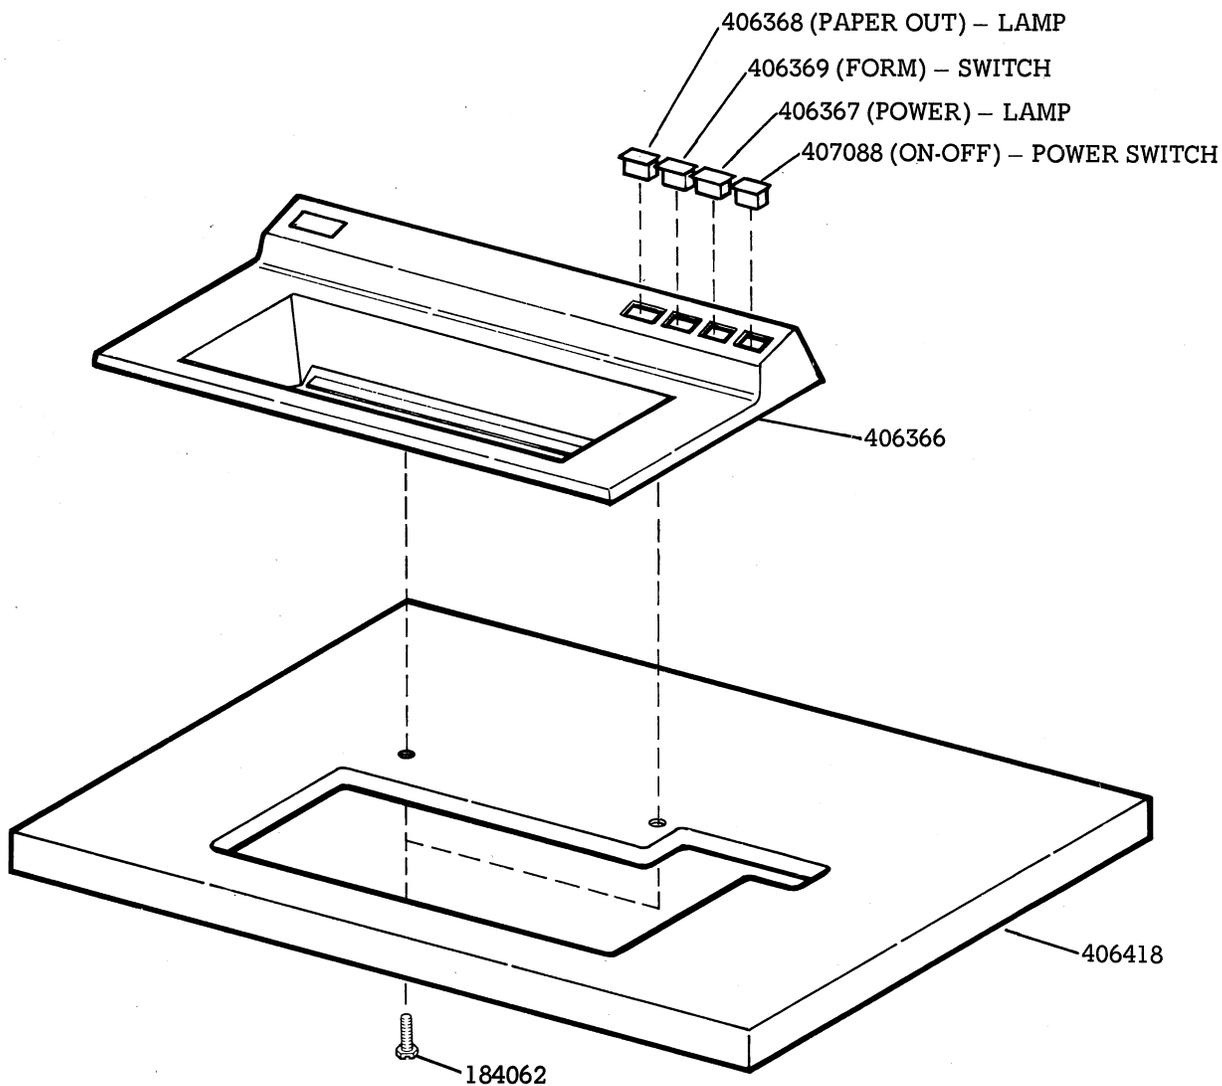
CAB302/ZZ Printer Cabinet Core for Forms Access Printer Cabinet (Cont)
